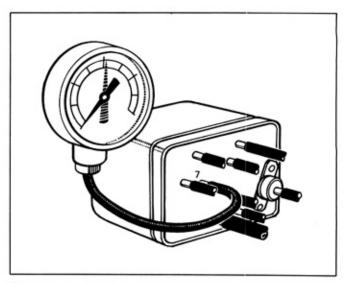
Vacuum Gauge Connection (2T-C)
